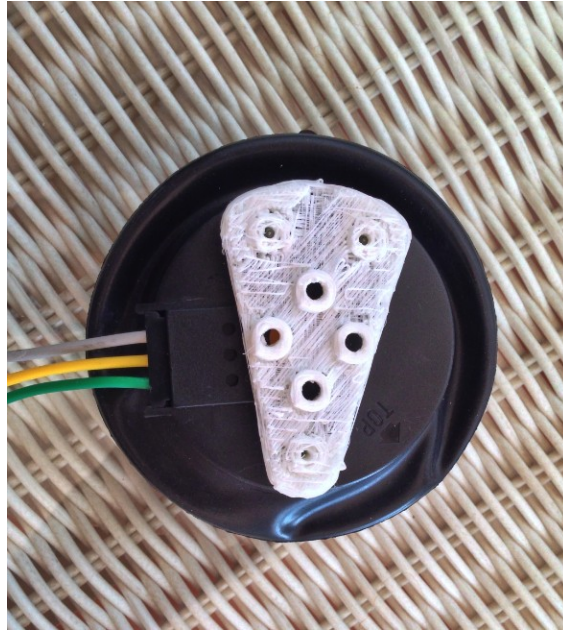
Part 2, close – up view from the bottom side of the actuator case.
